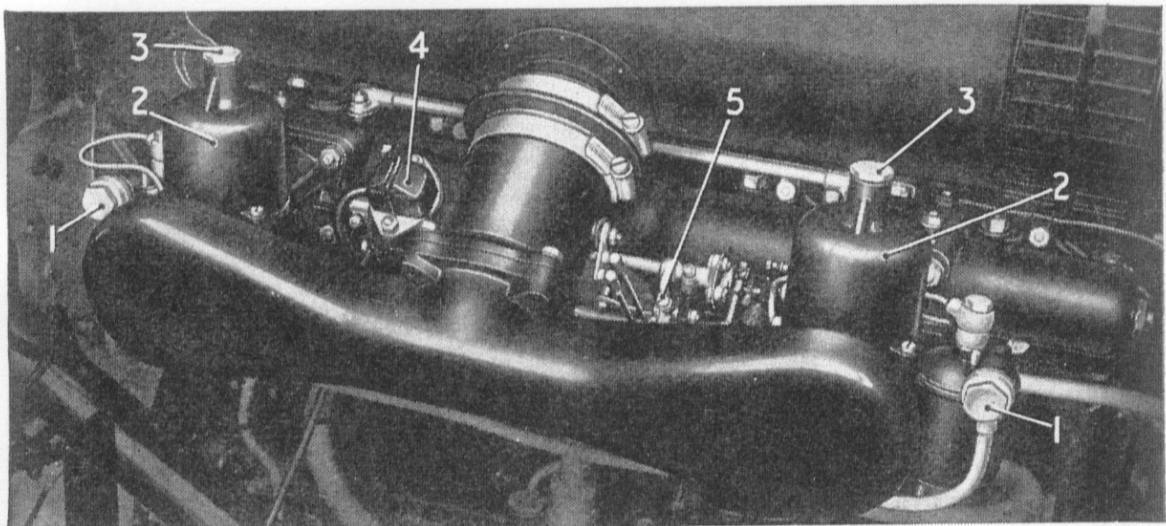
CARBURETTERS IN POSITION ON ENGINE.
